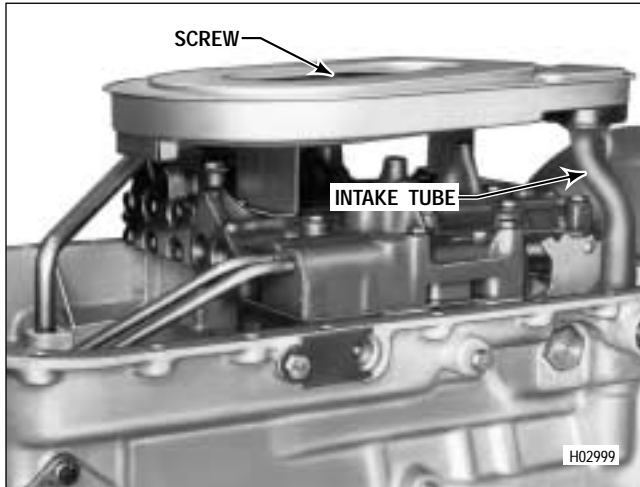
Installing Oil Filter Screw and Washer (Models Prior to S/N 3210622842)
